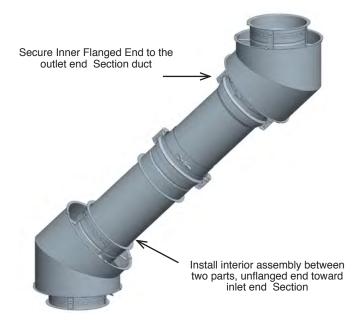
Step 5-6 - Install the inner LV and secure the outlet end Flange
